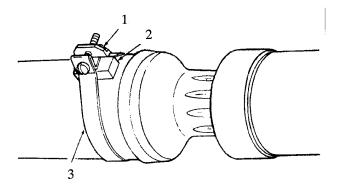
Clamp Weight to Rear Shaft Near Center Bearing
